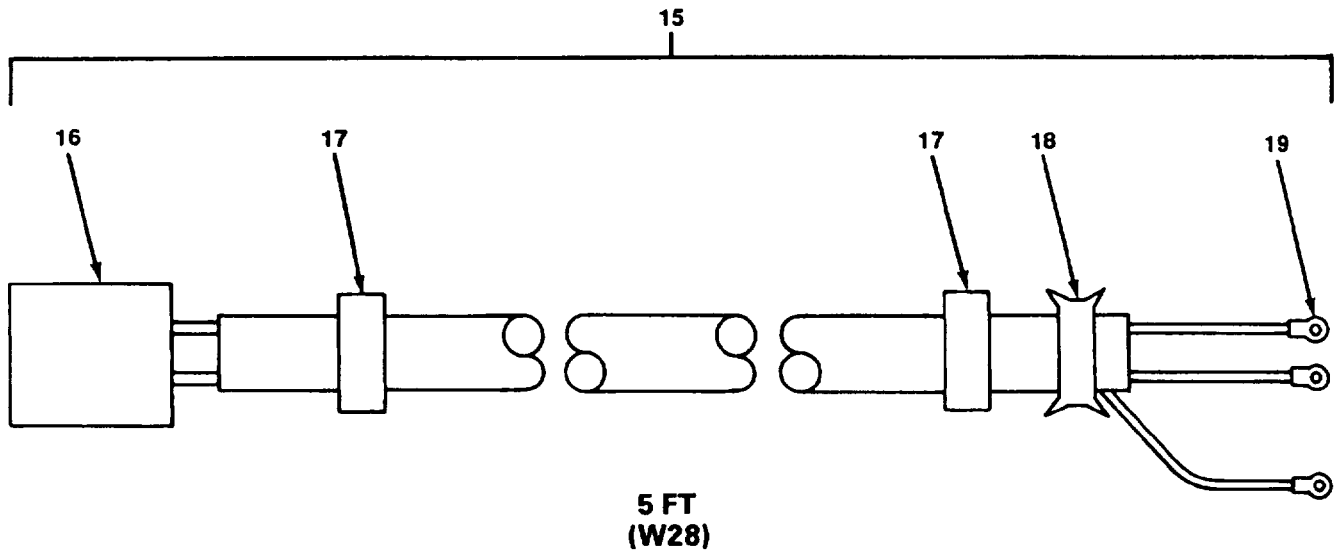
Cable Assemblies W25,W26,W28,W30throughW32(Sheet 2 Of 3).
